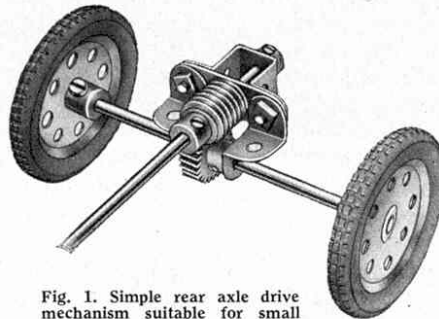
Simple rear axle drive mechanism suitable for small model cars.
